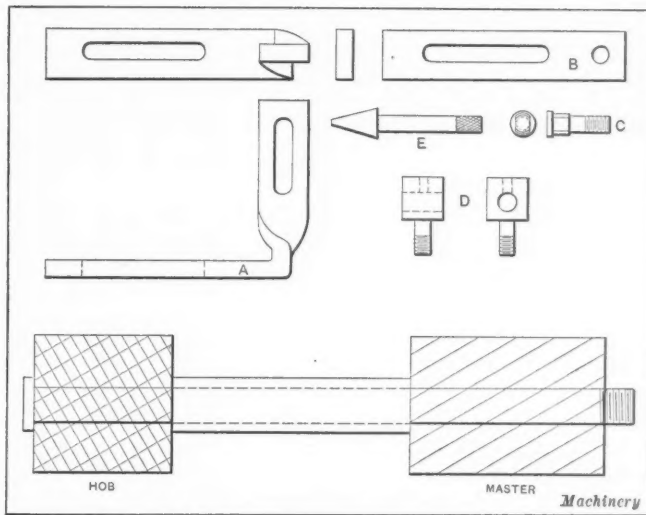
Parts of Attachment shown in Fig. 1, and Hob and Master set up on Arbor
